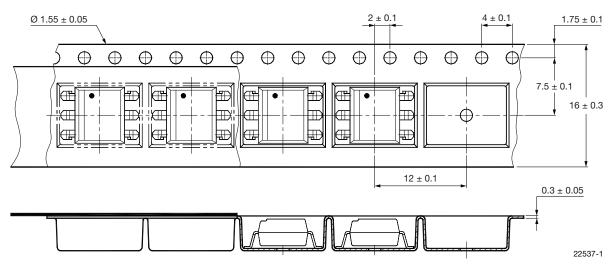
Tape and Reel Drawing, 1000 Units per Reel
